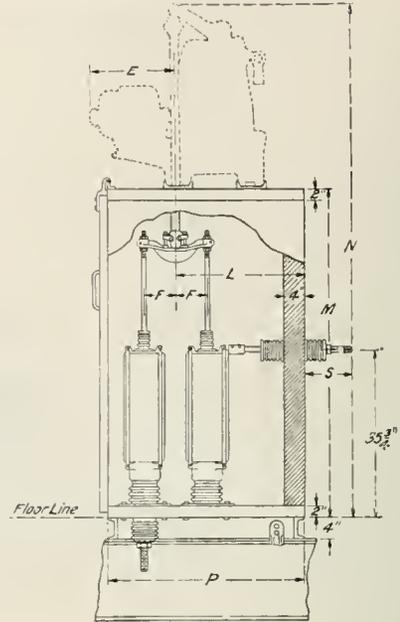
Bottom and Back Connected Type F Form H3 Oil Switch
